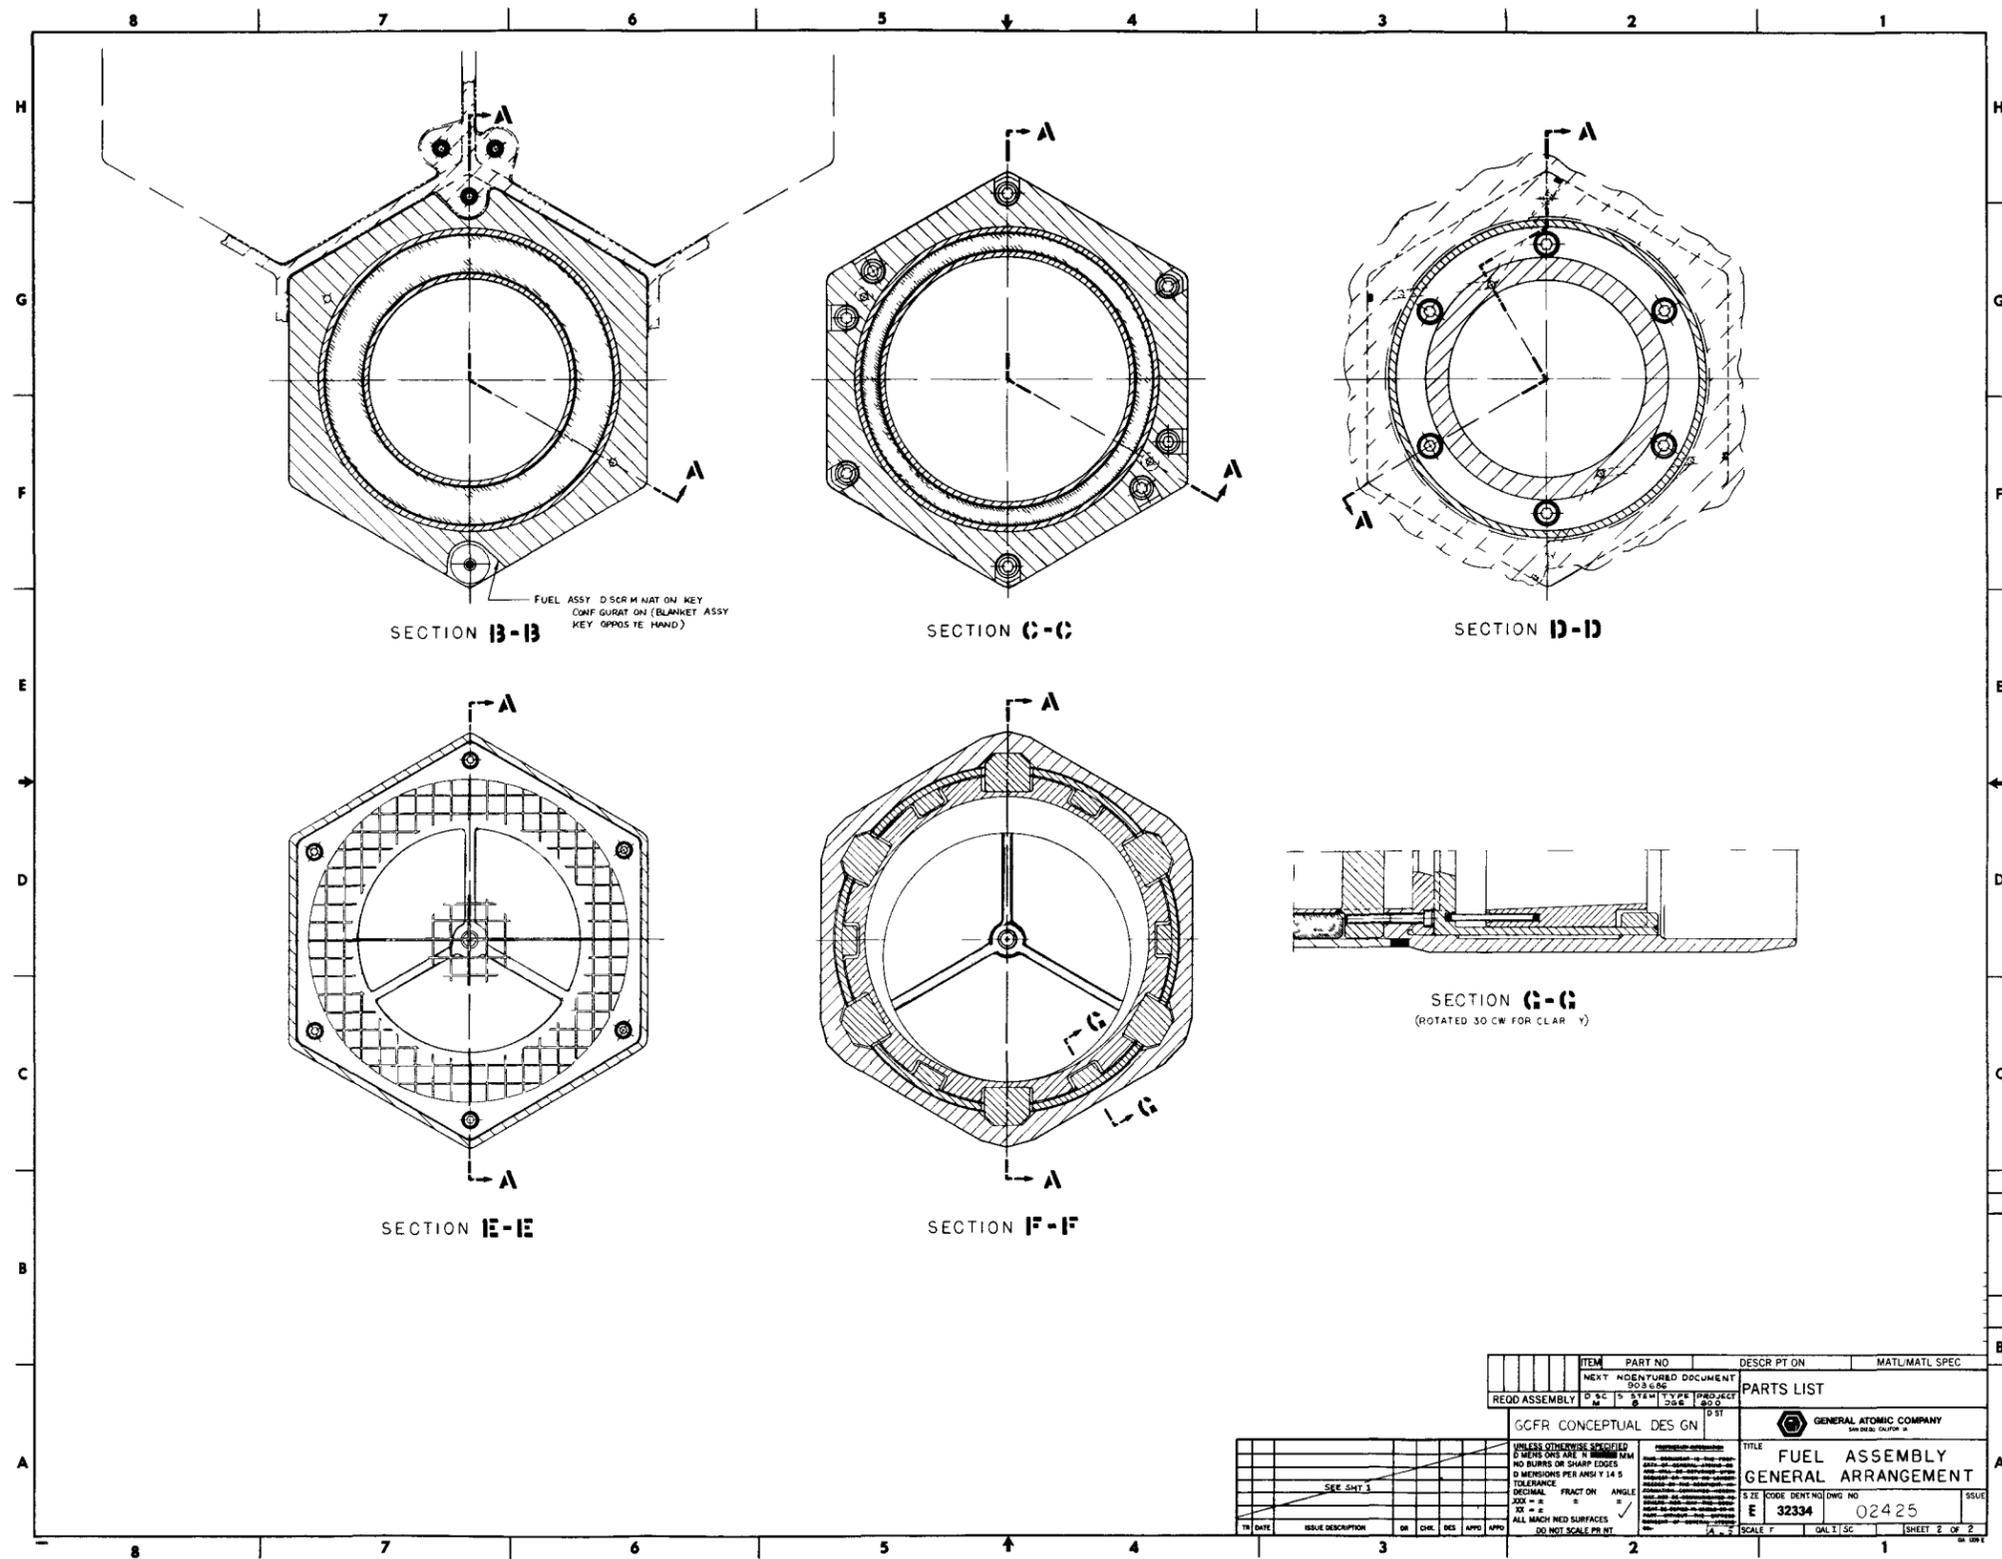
Fuel assembly, general arrangement (sheet 2 of 2)
